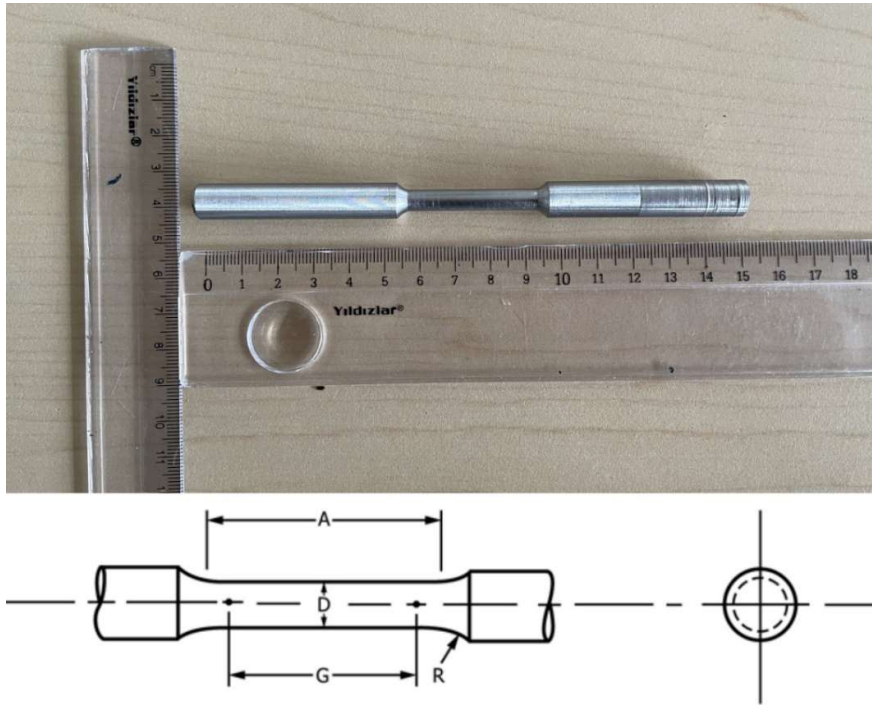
Photograph of the tensile test specimen (top) and the technical drawing (bottom) [80].
